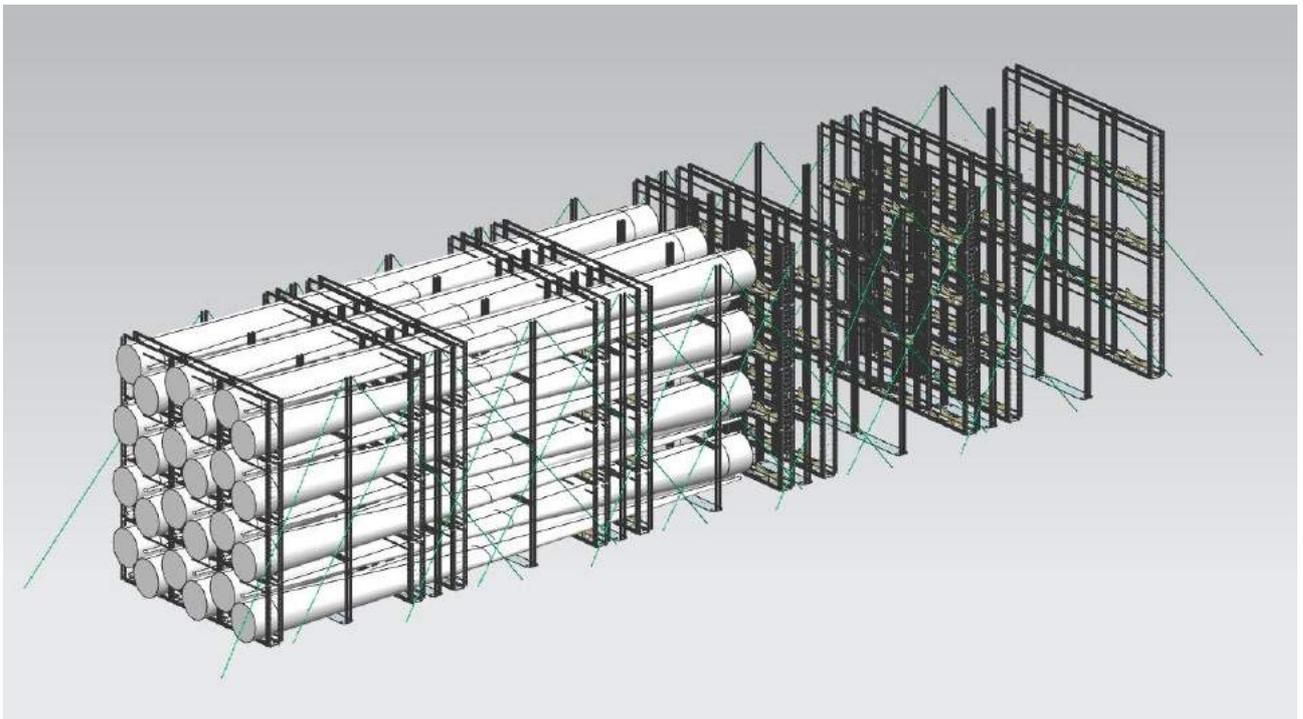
3.6 MW blades inside the racks (Perspective View)
